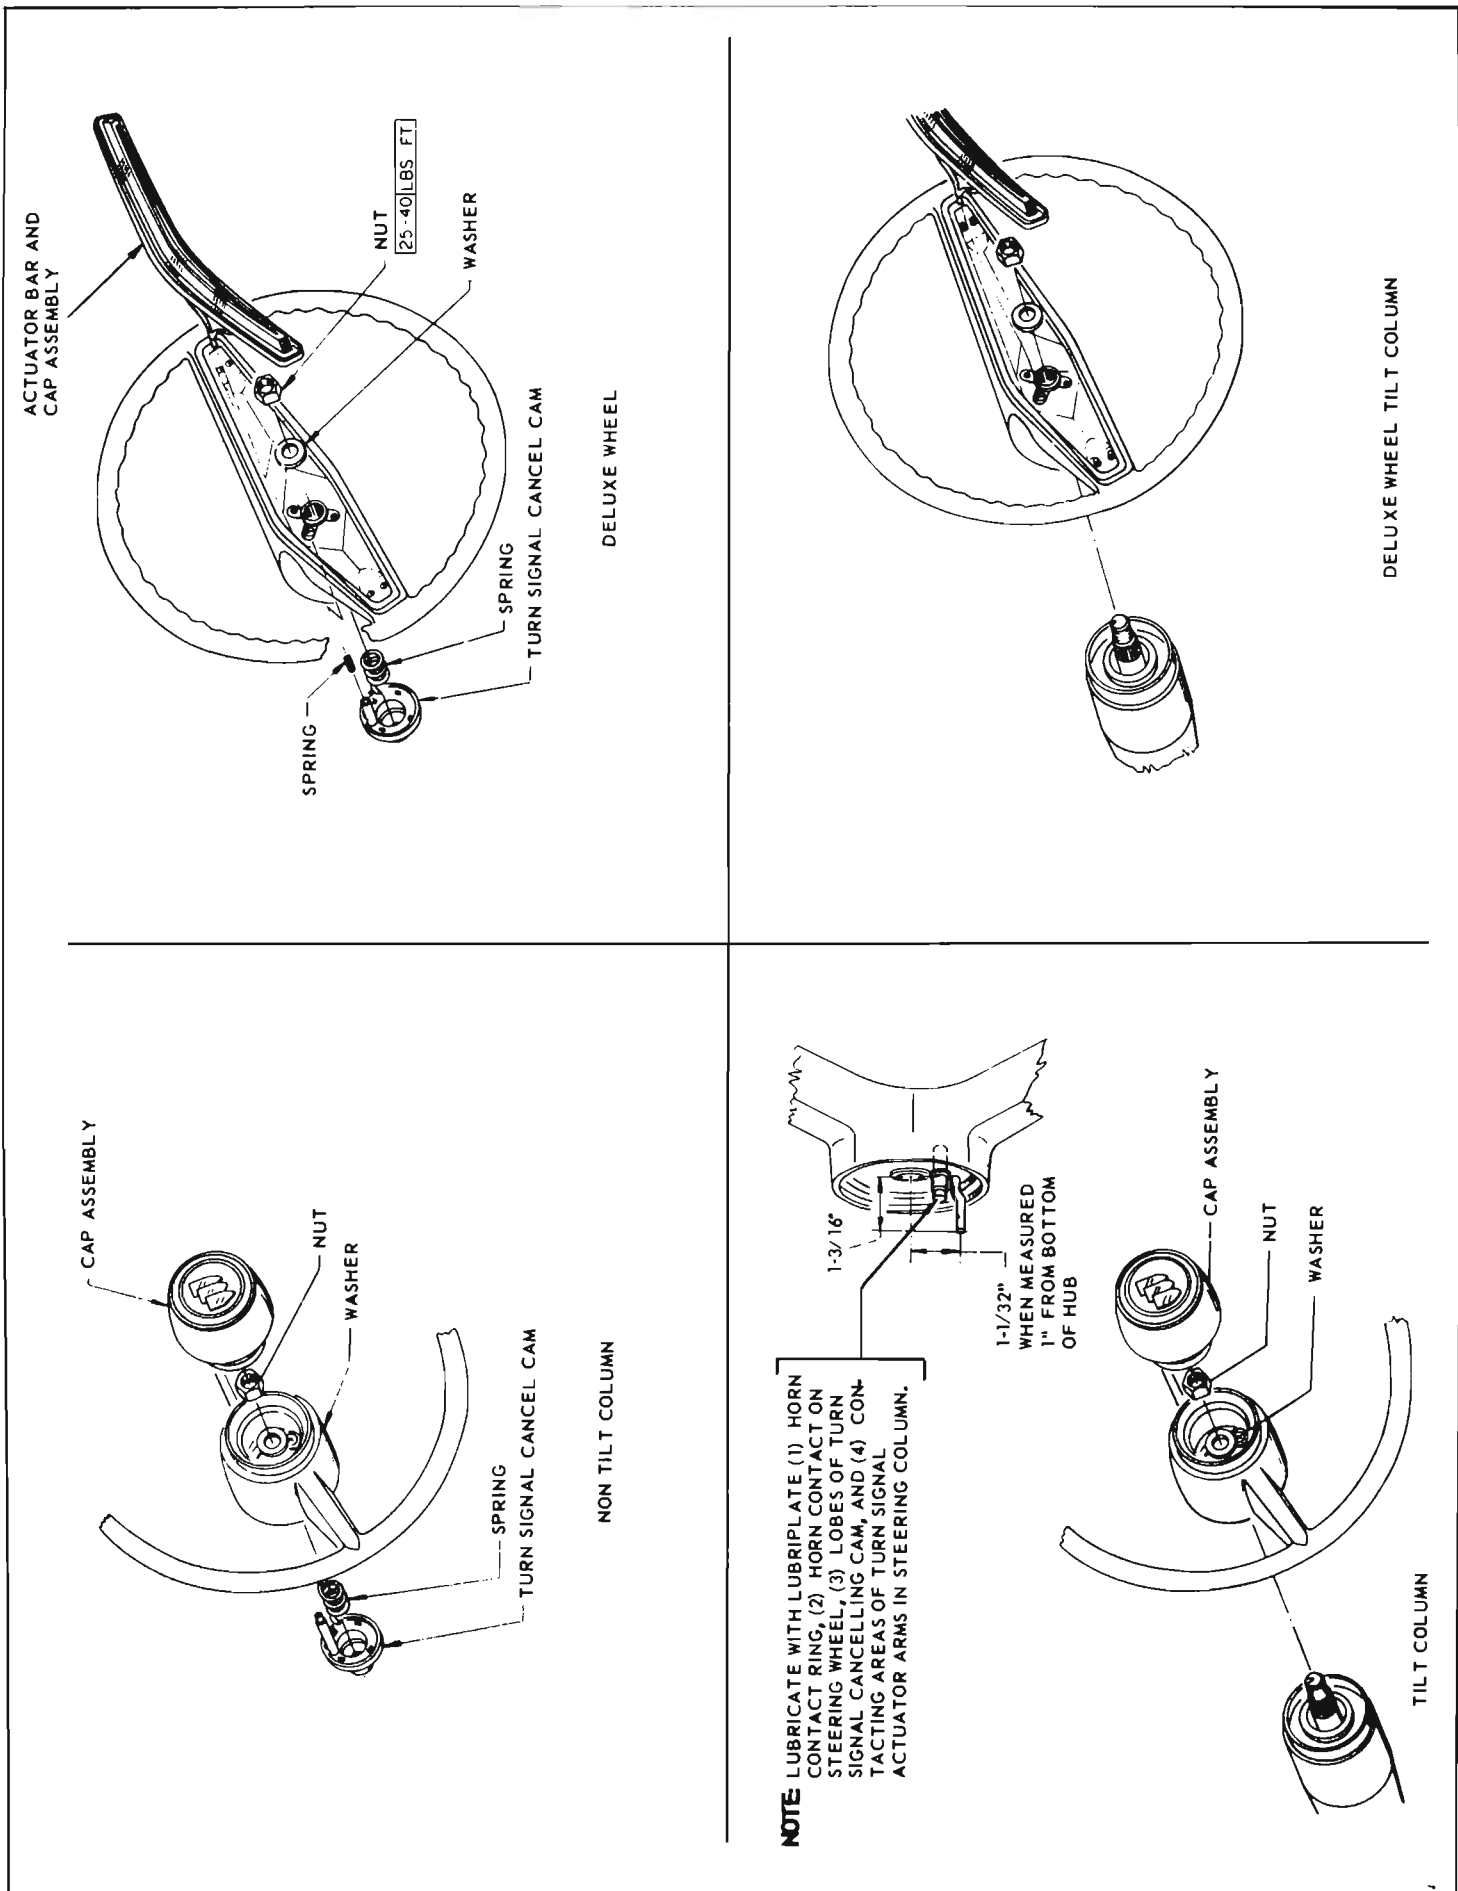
Deluxe and Standard Steering Wheel Installation
